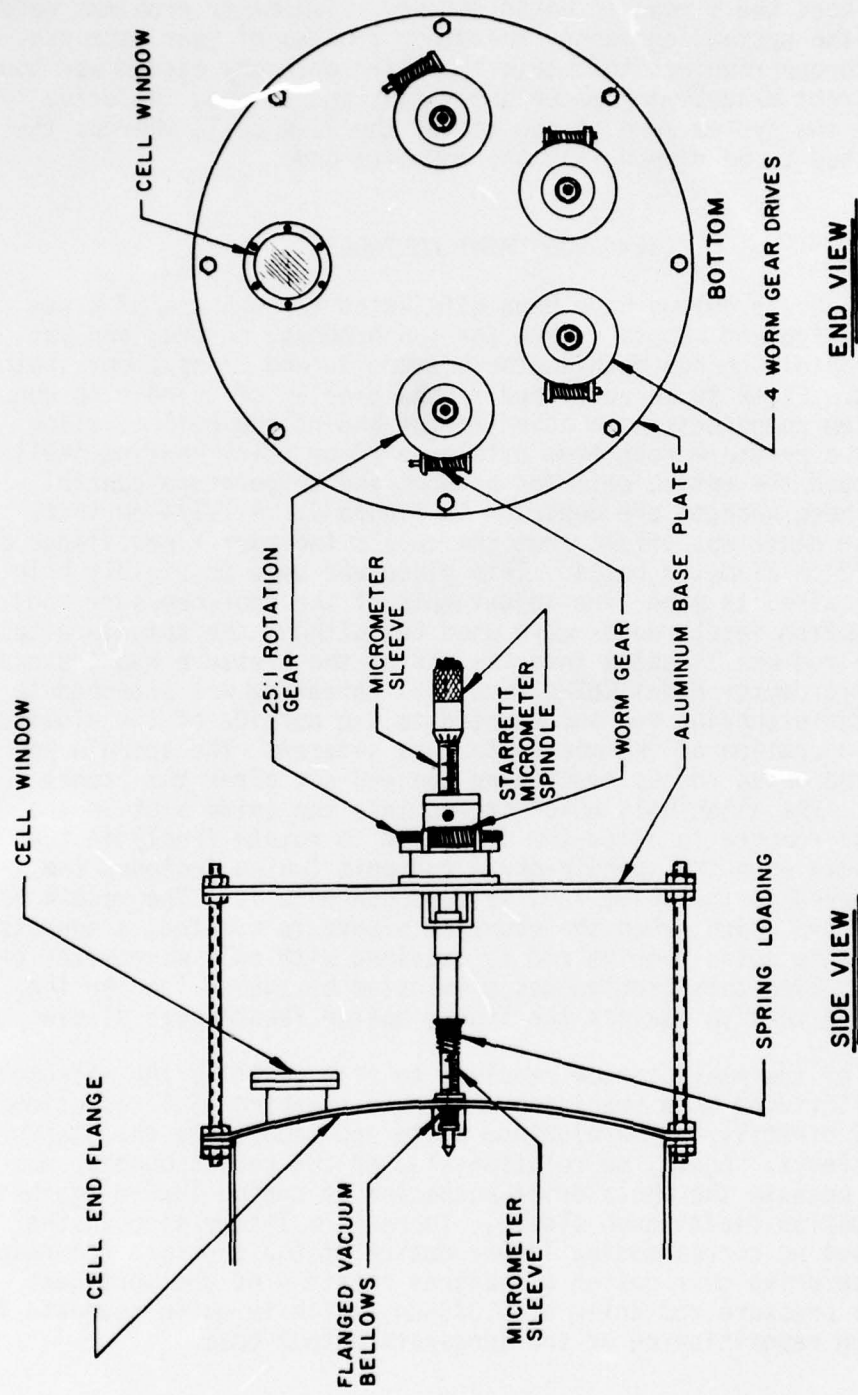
Aluminum base plate (end and side views) with attachment to the double-mirror end cell flange, new low-torque micrometer drive, and spring loaded attachment of the new drive to the old pressure rod and vacuum bellows arrangement.
